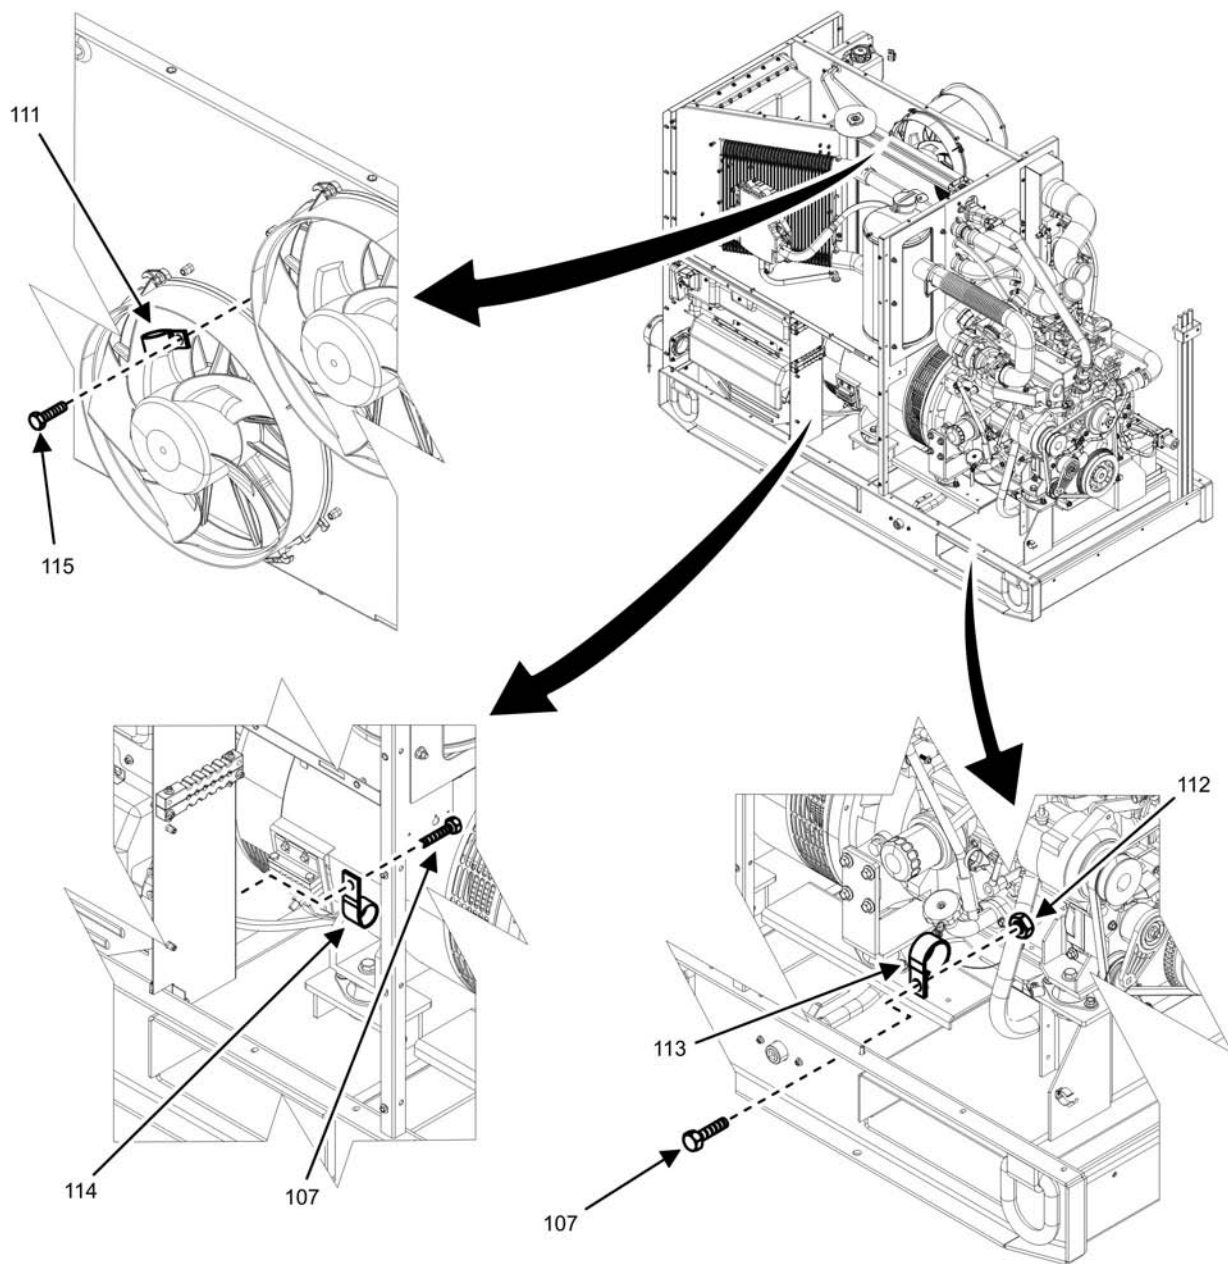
Engine Wiring Harness (Sheet 18 of 19).
